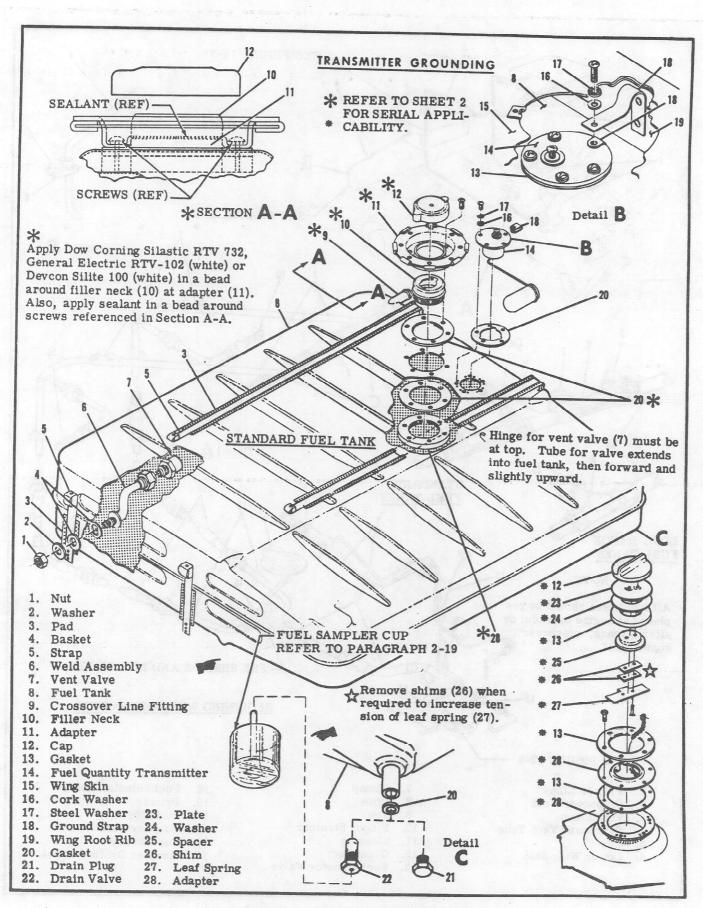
Fuel Tank (Sheet 1 of 2)
